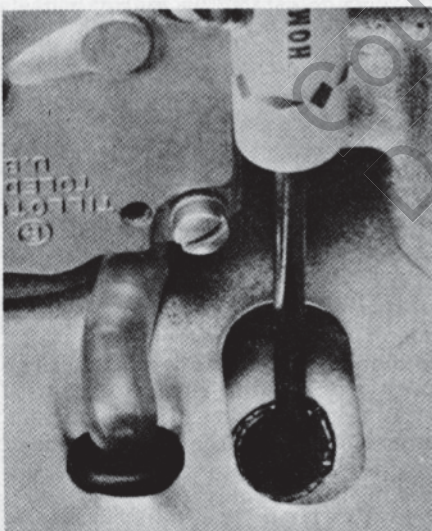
Access to governor spring adjusting screw (A—Fig. HL3) is gained by removing air filter cover, rubber plug (22—Fig. HL2) and the brass plug from engine crankcase. Then, turn engine so that screw can be turned with screwdriver as shown.
